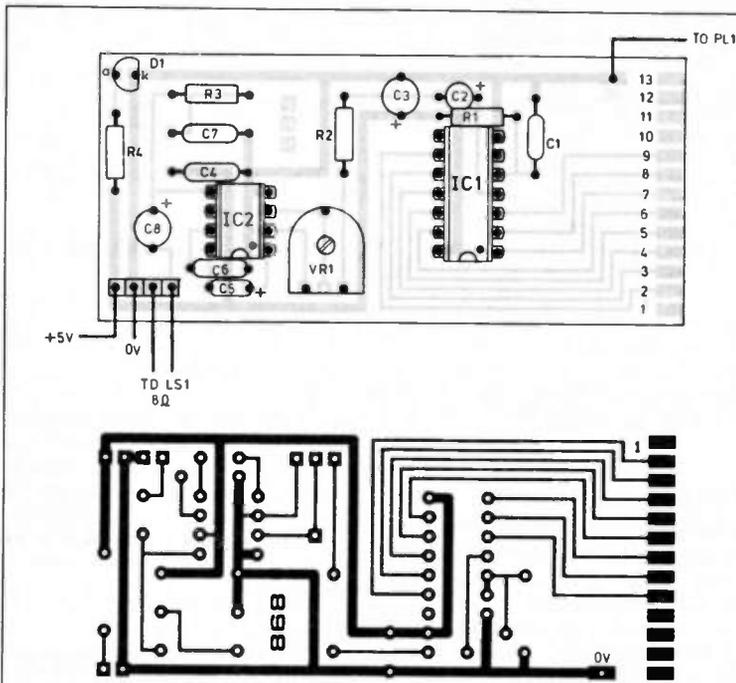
Printed circuit board component layout and full size underside copper foil master pattern.
